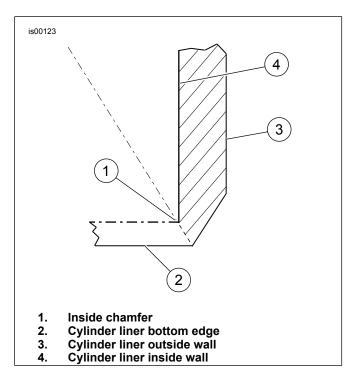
Inside Chamfer and Bottom Edge of Cylinder Liner
